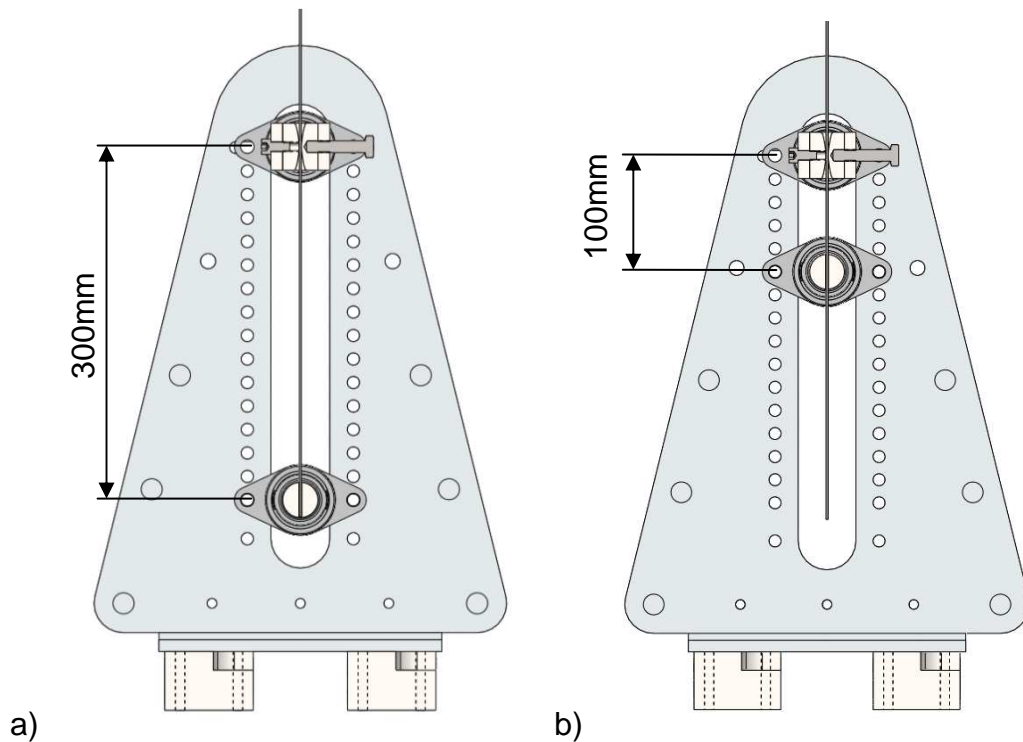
3D CAD section views of Blade test rig clamp shuttle showing a) 300mm clamp separation and b) 100mm clamp separation (as seen in previous Blade sculptures)
